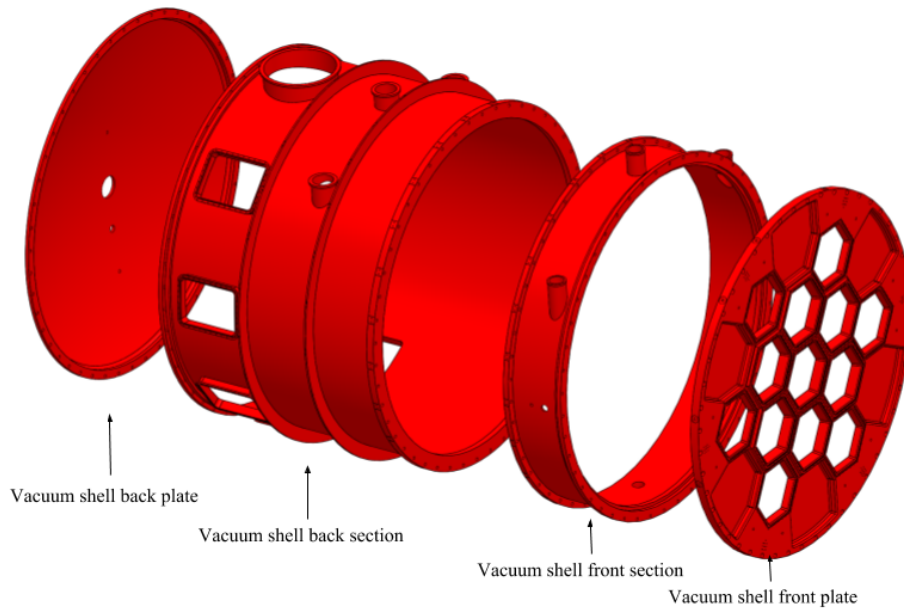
Exploded view showing the four major components of the vacuum shell. For scale, the assembled vacuum shell is 2.4 m long and 2.4 m in diameter. The front plate is reinforced where stress concentration is high, and weight-relieved where stress concentration is low. The front section shell is a 1.3 cm thick cylinder and the back section shell is a 0.6 cm thick cylinder. Two aluminum ribs are welded to the back section cylinder for additional strength. They are designed to be as weight efficient as possible to keep the cryostat within the total mass limit.
